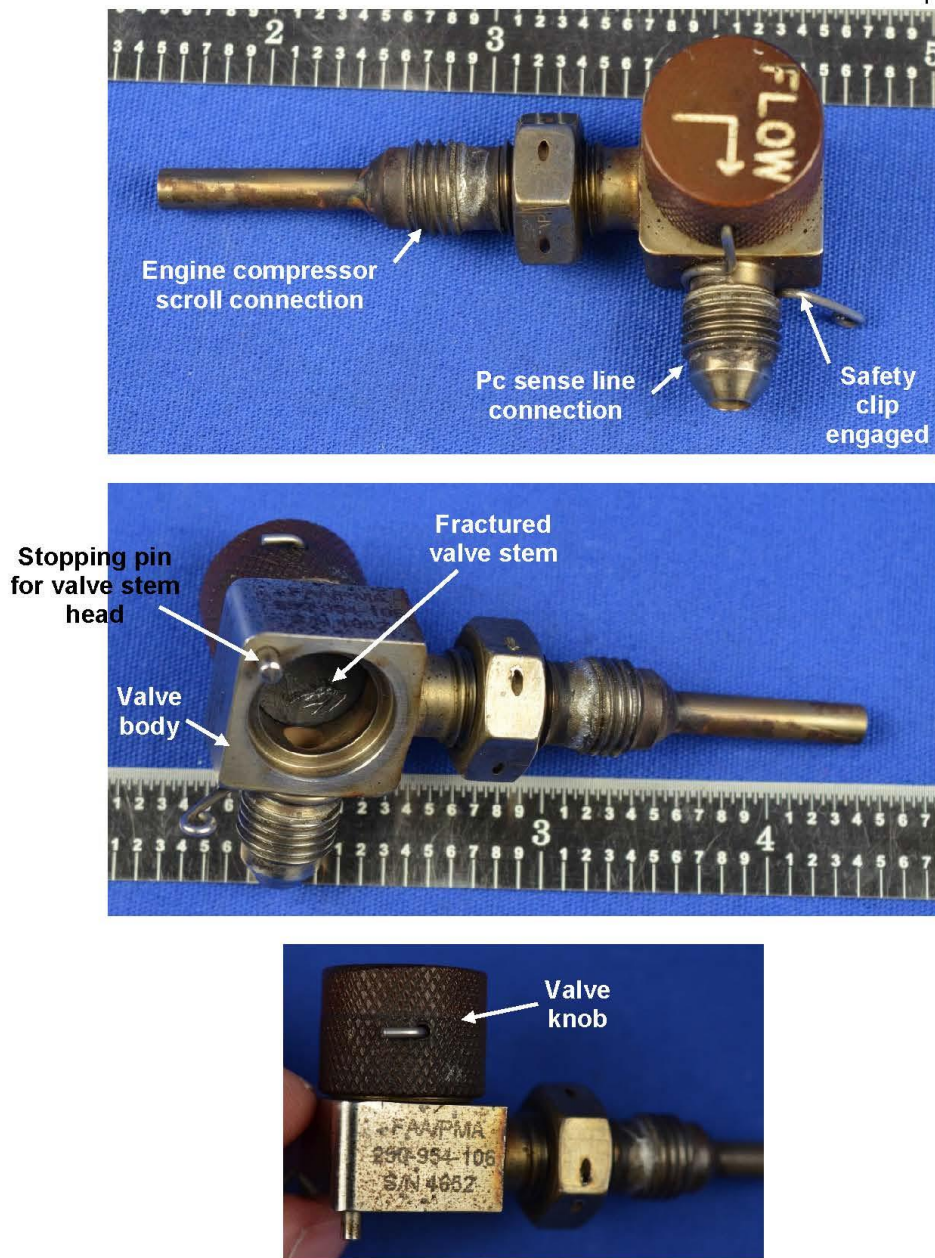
Views of the Pc safety valve received with a fractured valve stem (head not received).
